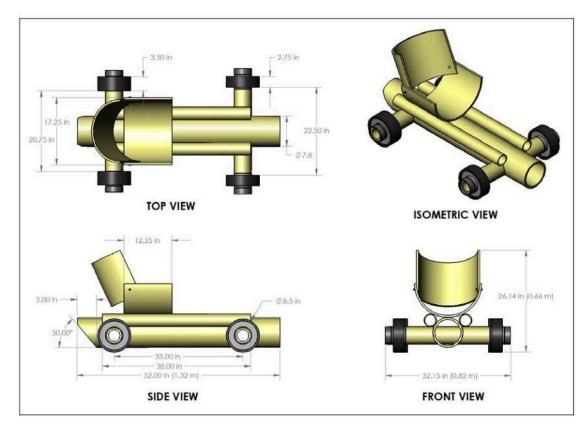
Steam Chariot [2006] CAD renderings (actual drawings could be larger and rotated landscape format to fill the page).
